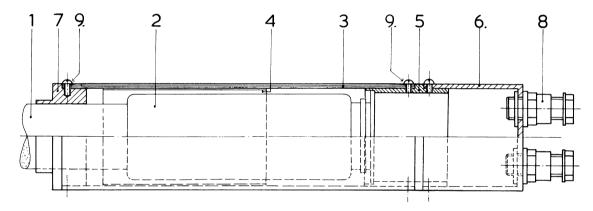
Example of plastic housing for 2 in. photomultiplier tube, glued to the light guide. 1. Light guide; 2. Photomultiplier; 3. Outer cylinder; 4. Mu-metal screen; 5. Moulded electrical assembly; 6. Back cover; 7. Front-end piece; 8. Cable clamps; 9. Securing screws.
